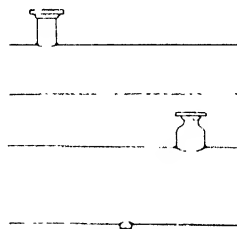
(Top), WELDED-ON BRANCH PIECE
